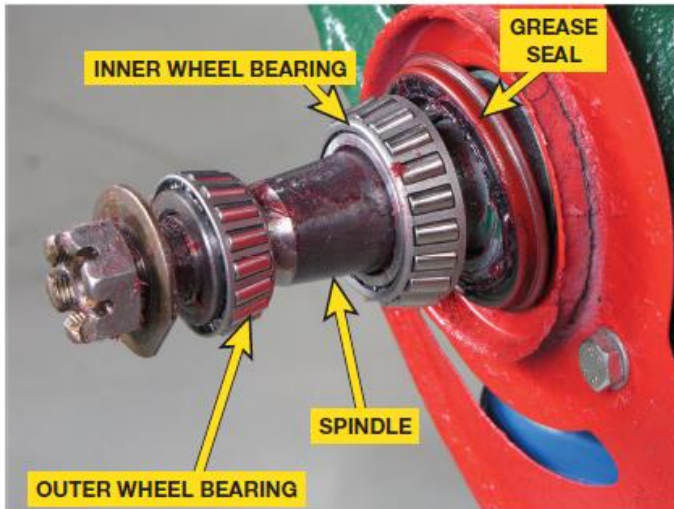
Two-piece wheel bearing requires adjustment when being installed.
